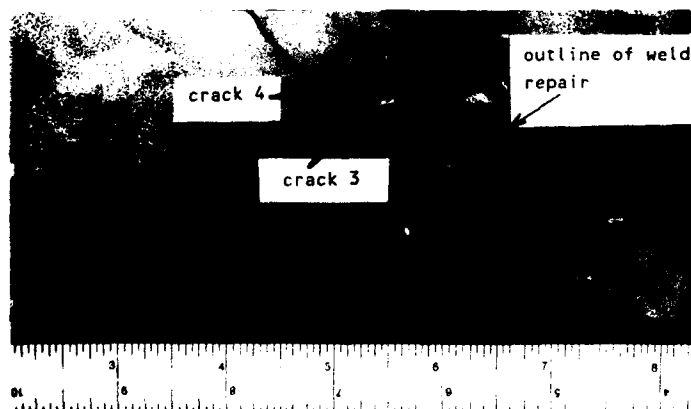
Low Magnification Surface View of Cracks 3 and 4
